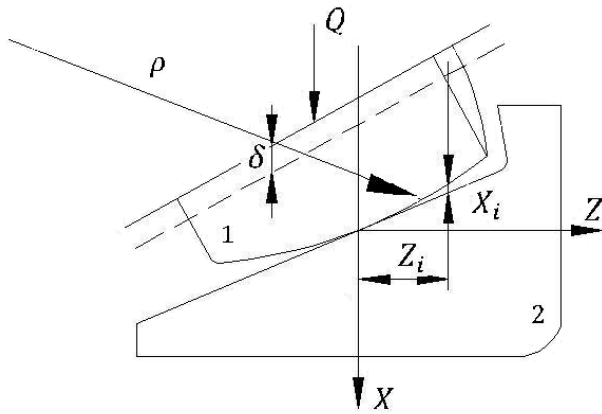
Scheme of contact of the conical roller with the inner ring
